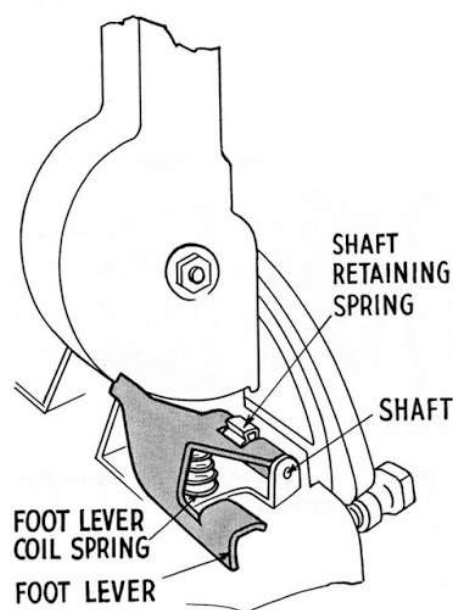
Foot pedal assembly, Models 27-28-80 and 305
